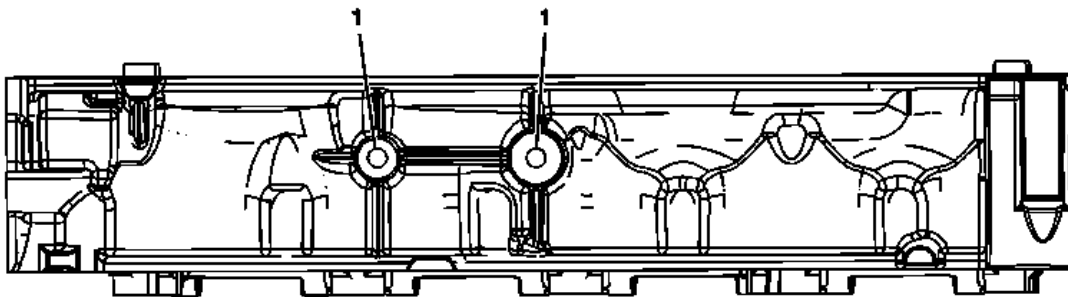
Identifying Bolt Size & Locations On Lower Crankcase - Left
